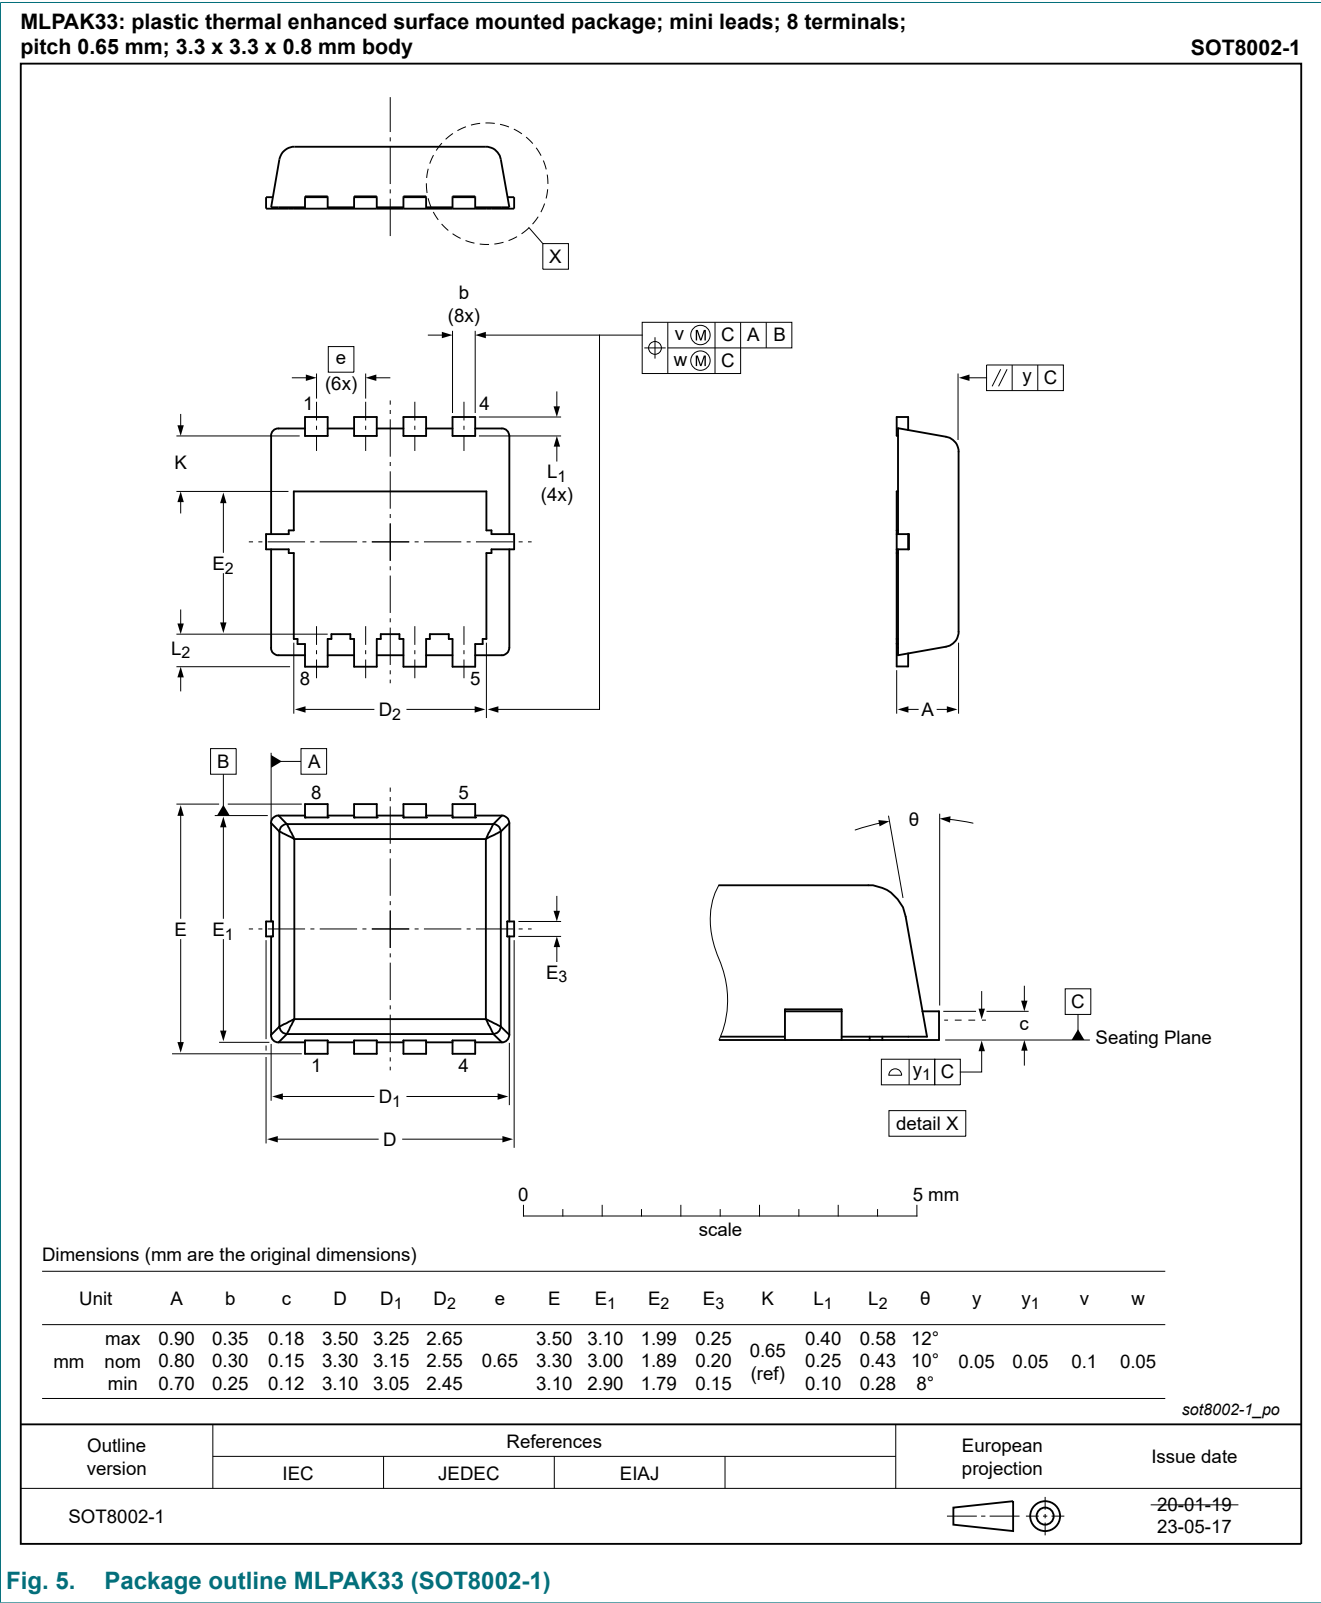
Package outline MLPAK33 (SOT8002-1)
